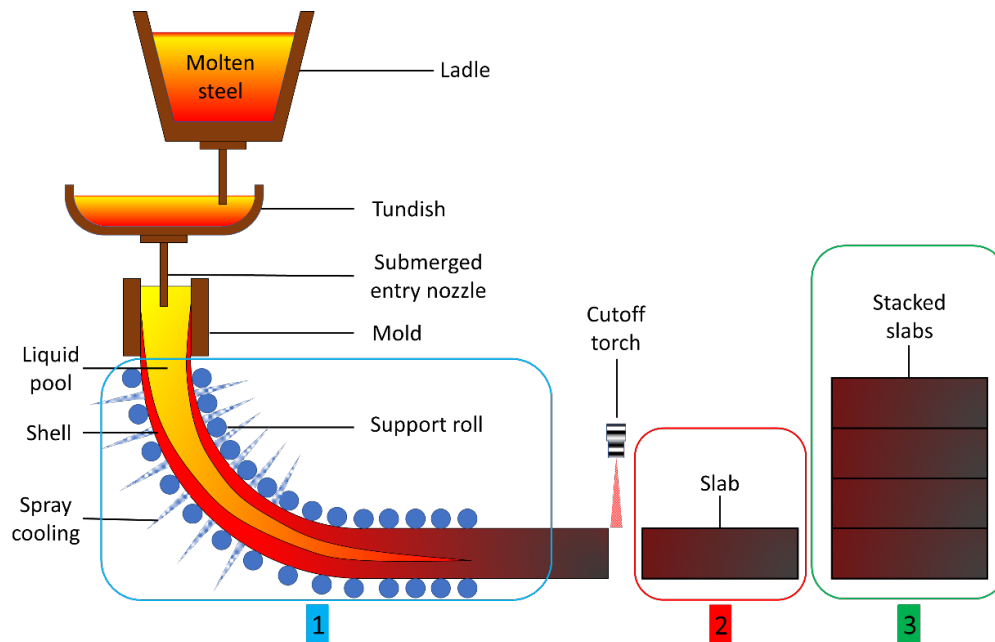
Schematic of continuous casting process. Section 1 is the secondary cooling zone. Section 2 and 3 is the cooling after casting for single slab and stacked slabs, respectively (after [12]).
